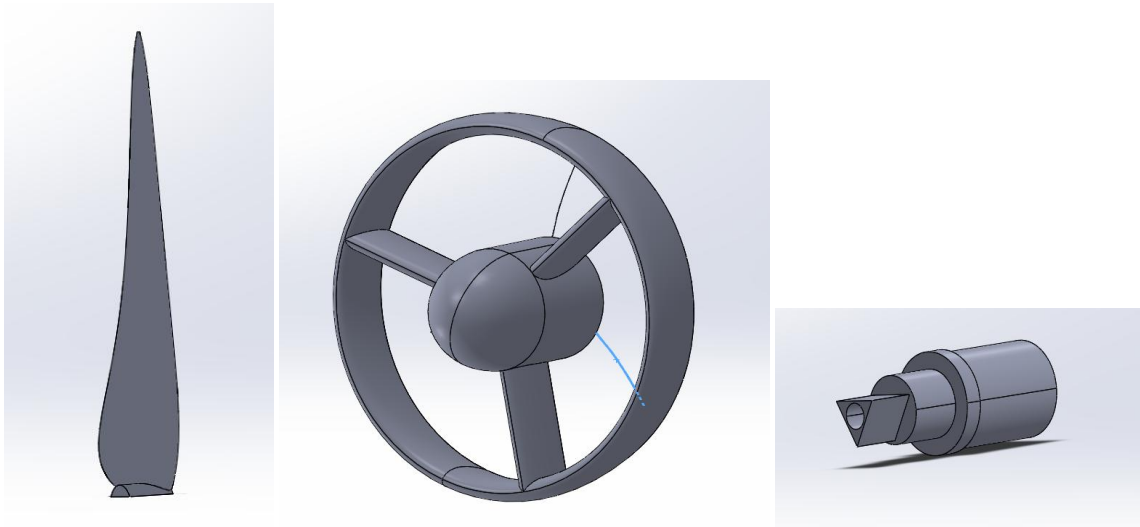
Three dissected parts used for 3D resin printing and assembly of complete rotors for physical testing
